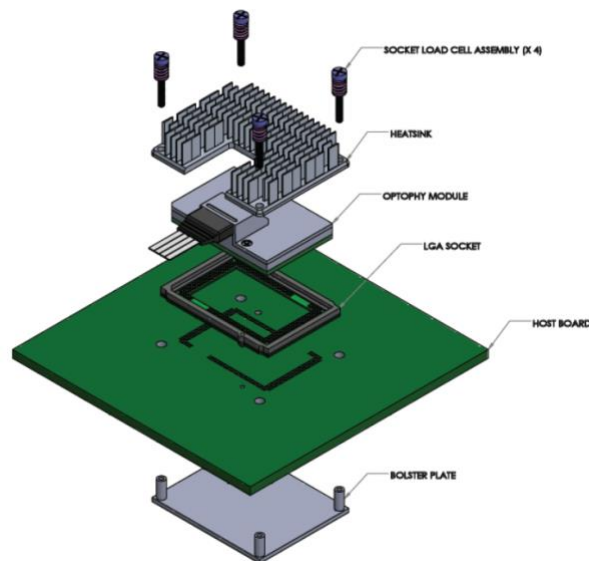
Optical module assembly using an LGA interposer for PCB attach (courtesy of Cisco)
